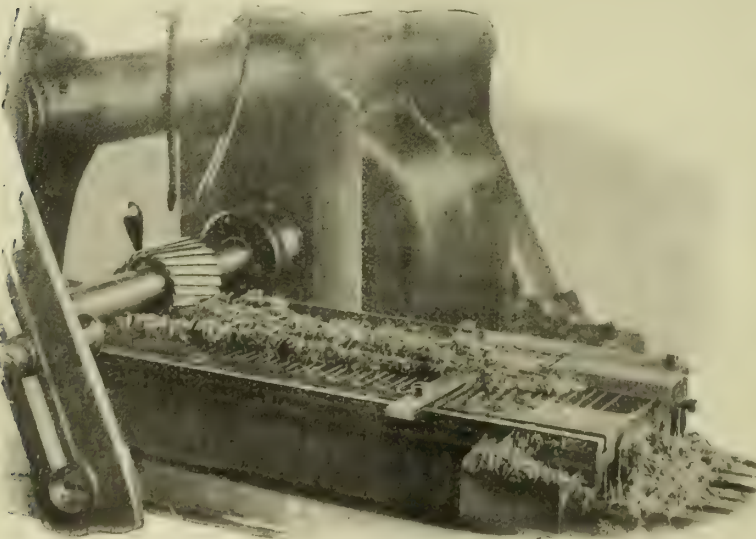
A Magnetic Chuck in use on a Milling Machine.
